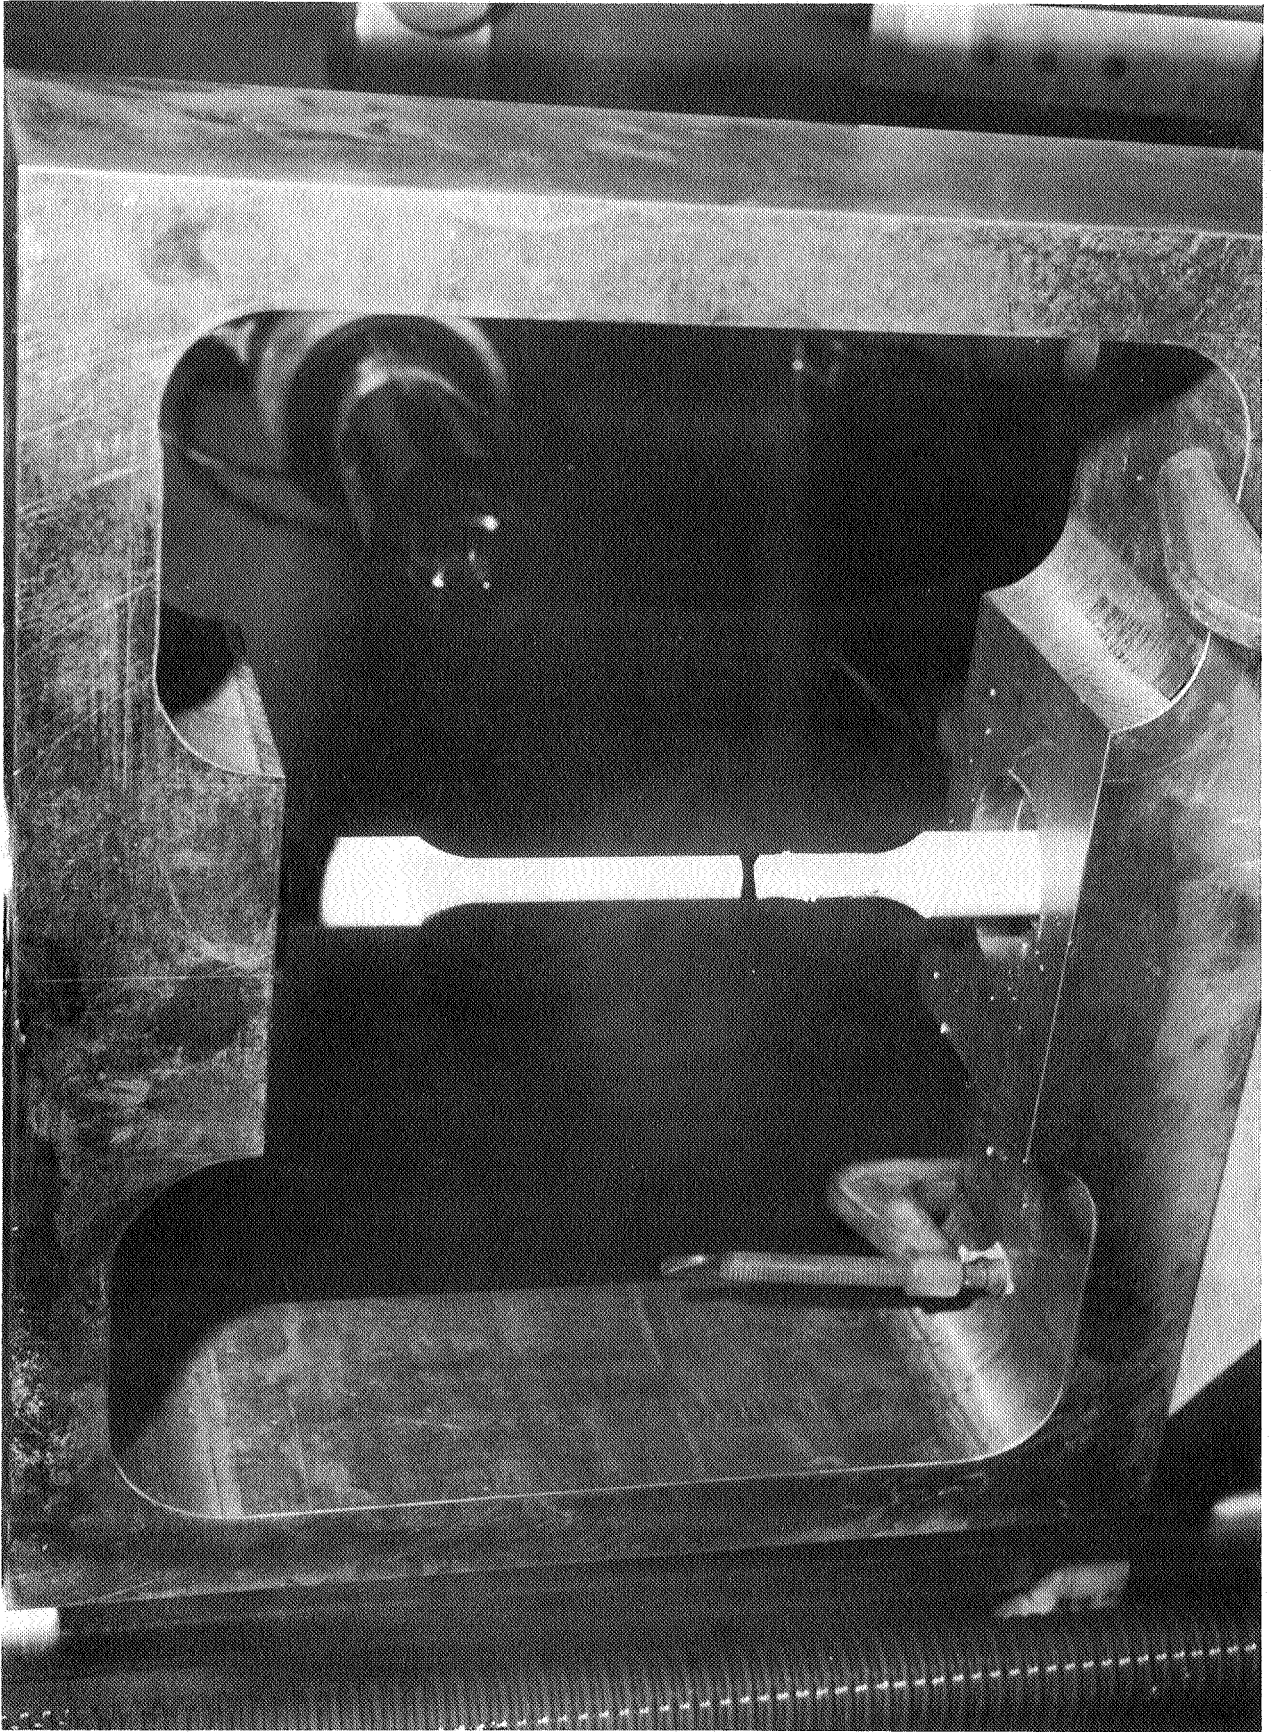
Test Specimen in Alignment Fixture — After Test
